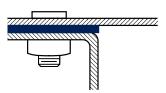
Insert Pressed-In and Flared Makes EMI Tight Joint (Alternate: Weld or Cement with Conductive Epoxy)
